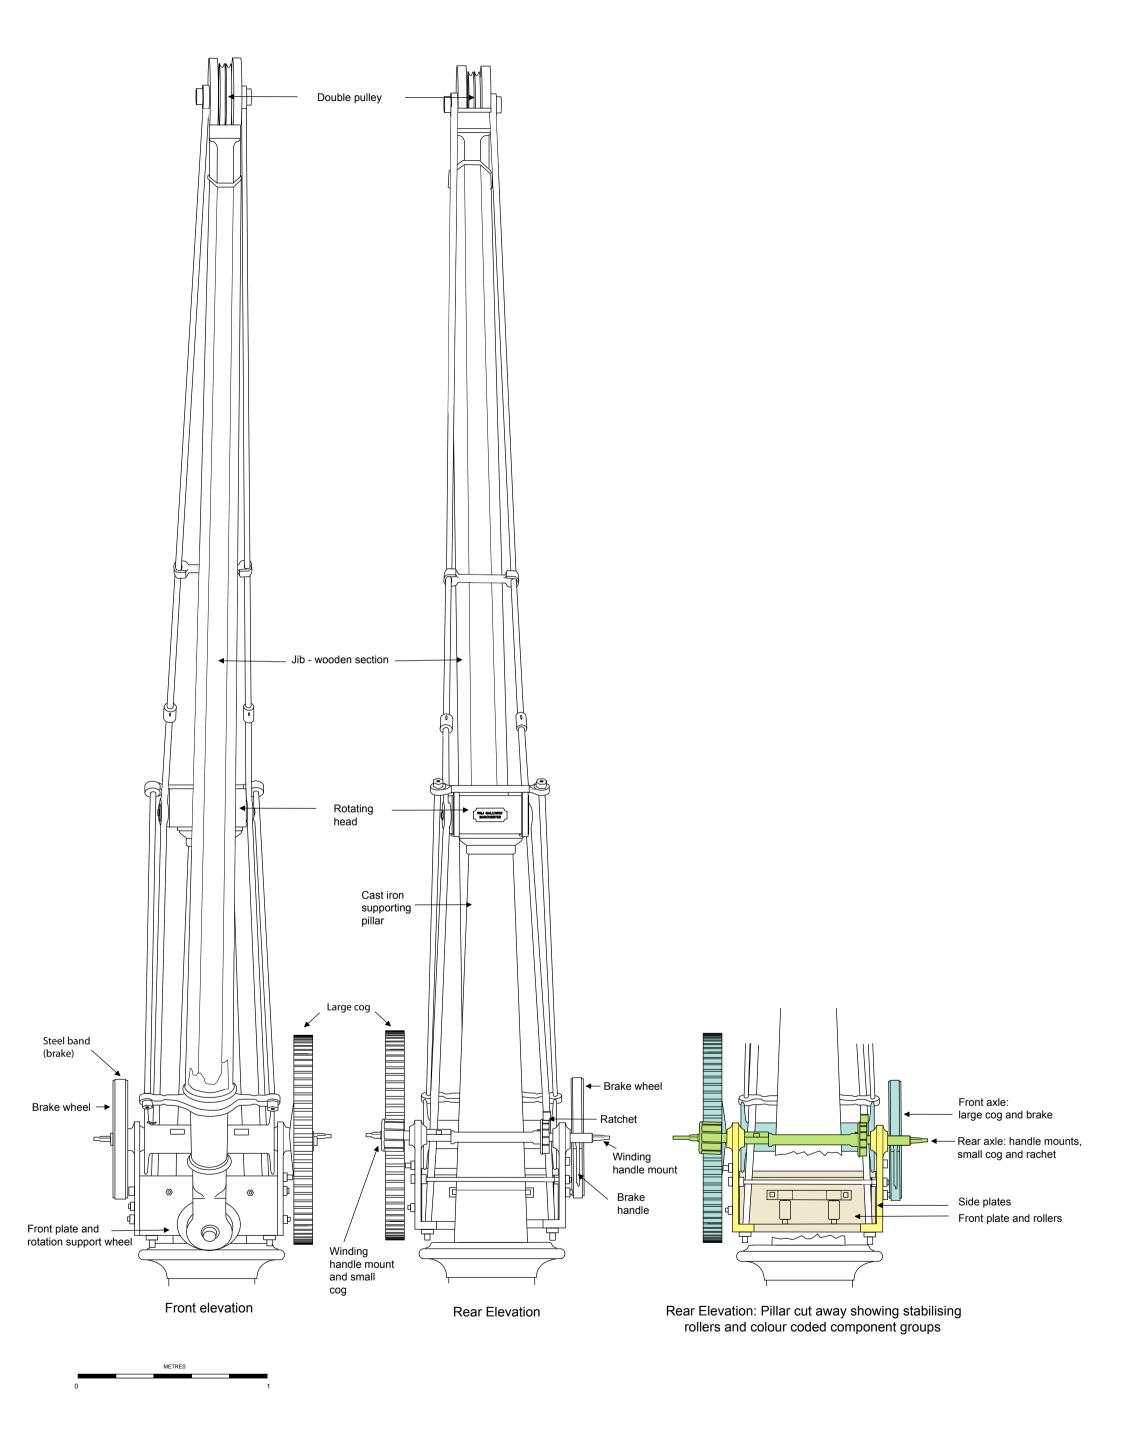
Site 3(13) Crane (Llechwedd exchange sidings) front and rear elevations and cut away
